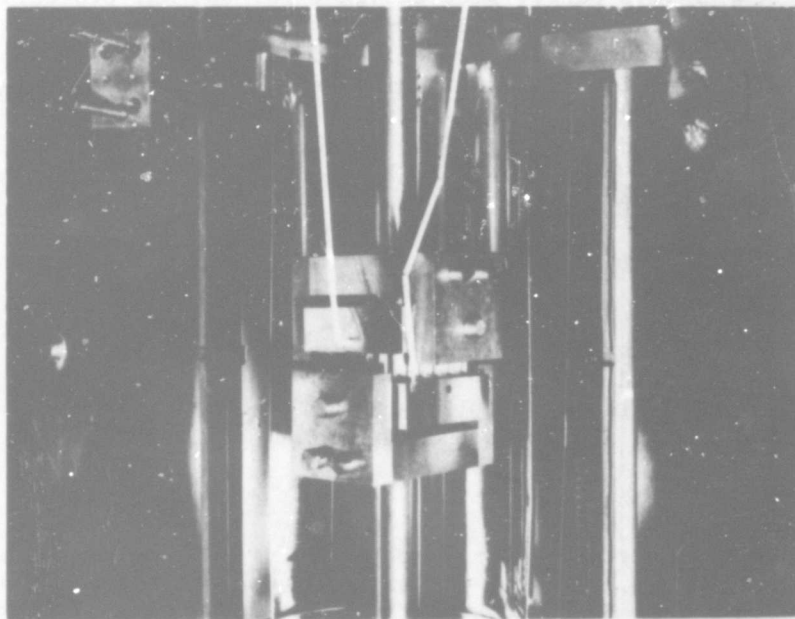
FLATWISE TENSION SPECIMEN FIXTURED
